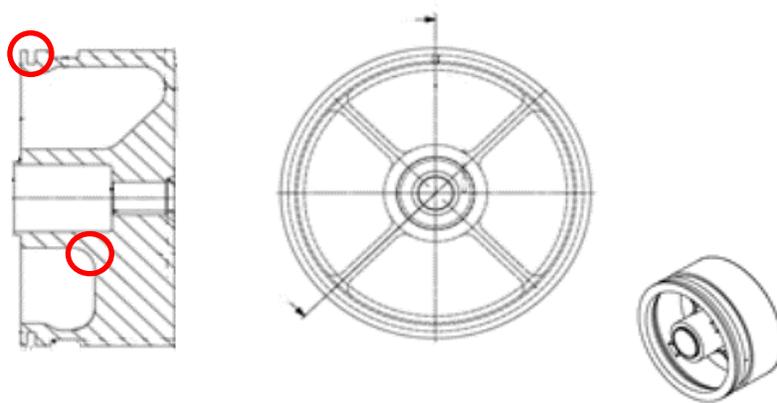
TYPICAL PISTON HALF WITH TYPICAL POSITIONS OF HIGH ALTERNATING STRESS INDICATED IN RED.
